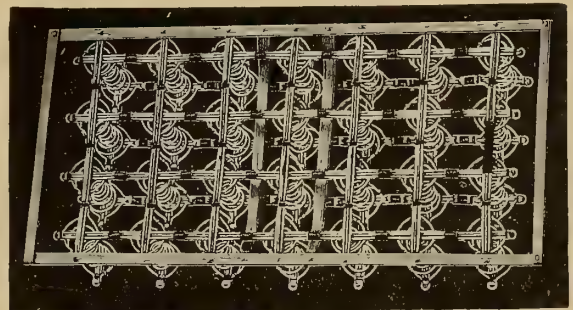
SPRING EDGE CUSHION SPRINGS.
